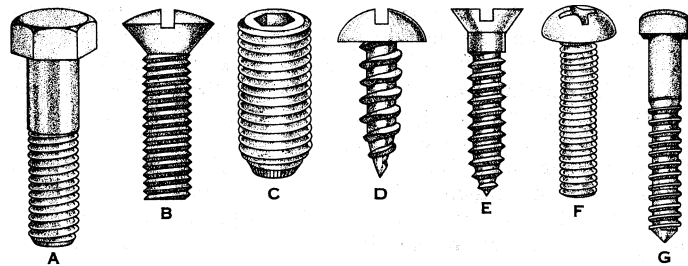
SCREWS AND SCREW HEADS: (A) CAP SCREW. (B) MACHINE SCREW WITH OVAL HEAD. (C) SET SCREW WITH HOLLOW HEAD. (D) SELF-TAPPING SCREW. (E) FLAT-HEAD WOOD SCREW. (F) PHILLIPS HEAD SCREW. (G) LAG SCREW
